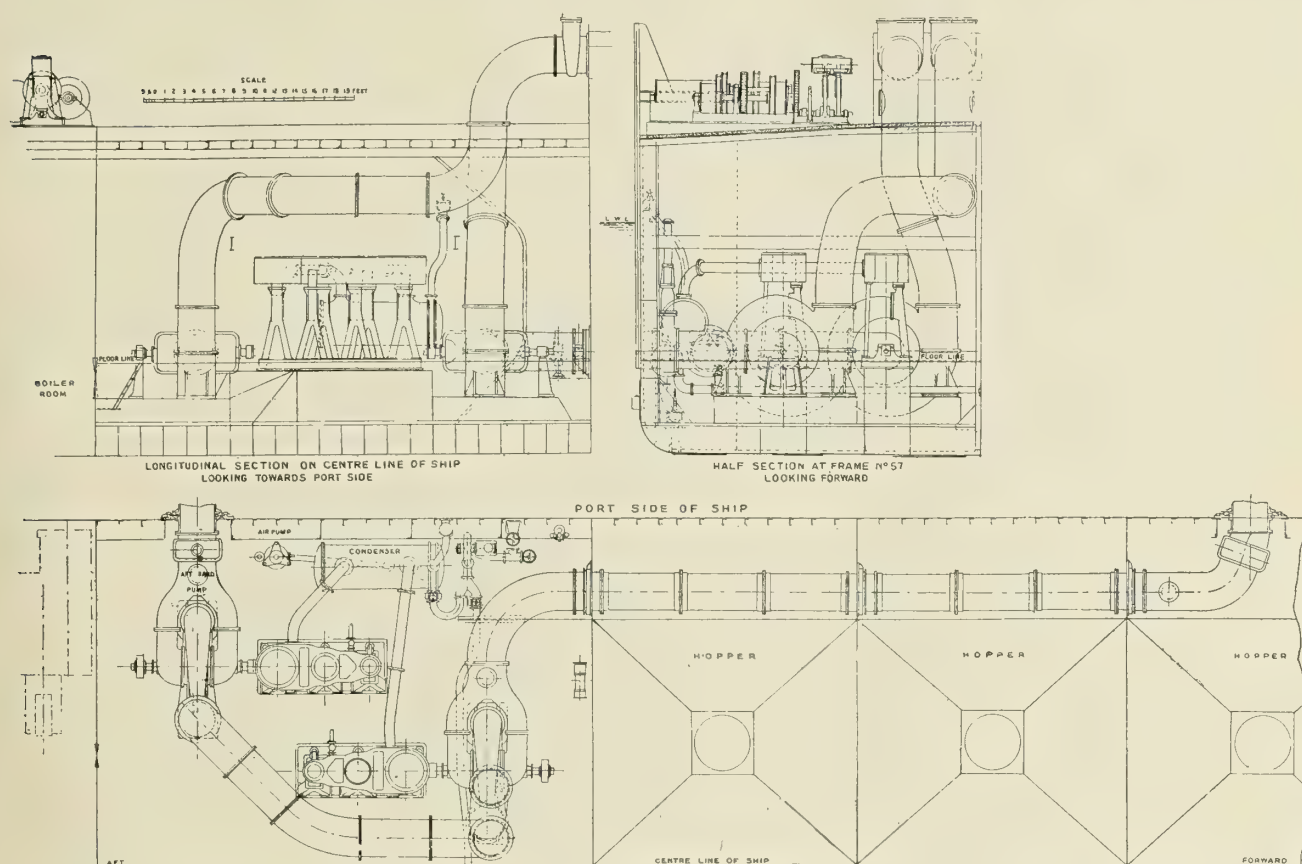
ARRANGEMENT OF MACHINERY IN PUMP ROOM.
